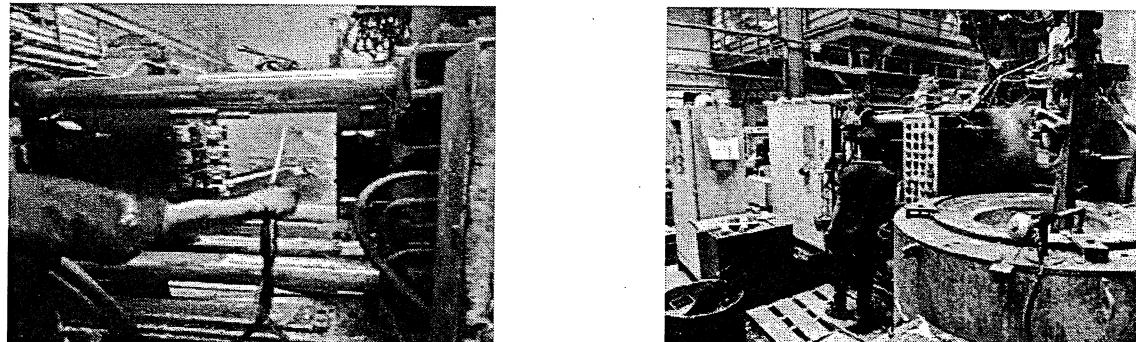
High-Pressure Aluminum Die Casting Machine and Aluminum Melting Furnace
